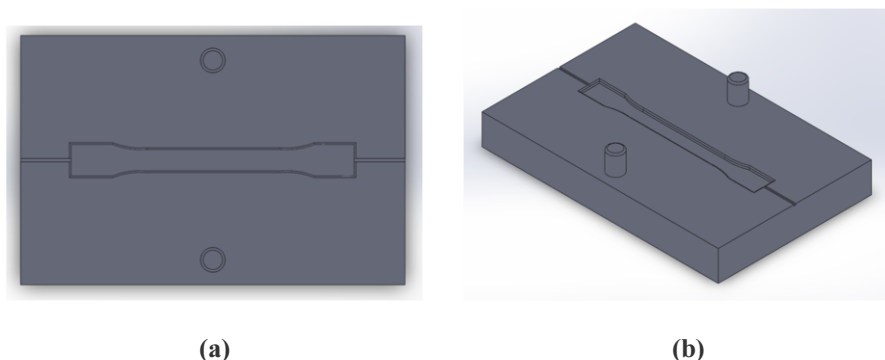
Mold cavity with air vent developed in SolidWorks CAD version 2016 (a) Top view (b) Isometric view
